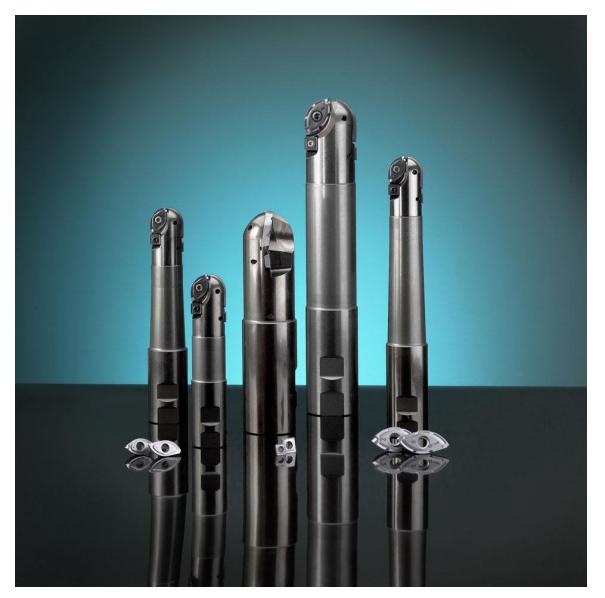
Ball nose end mills. These cutters are able to produce elaborate contours and are often used in the machining of dies and molds. (See also Fig. 24.2d.) *Source:* Courtesy of Dijet, Inc.
